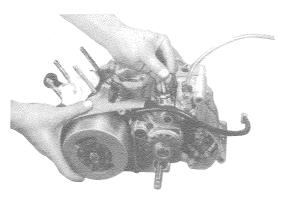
Disconnecting neutral indicator switch wire
